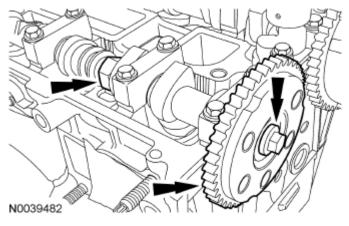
Locating Flats On Camshaft, Bolt And Exhaust Camshaft Sprocket Courtesy of FORD MOTOR CO.
